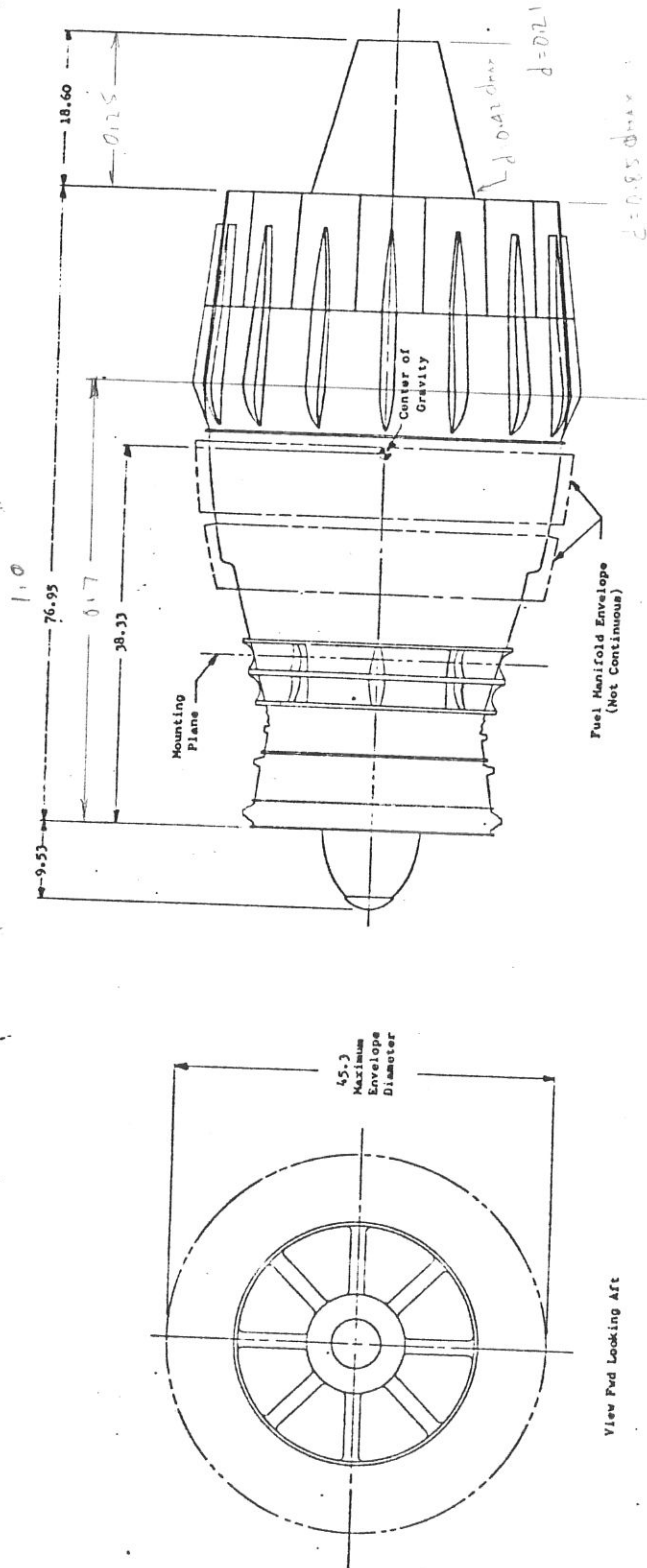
GE14/FZ1 Engine Installation Drawing
